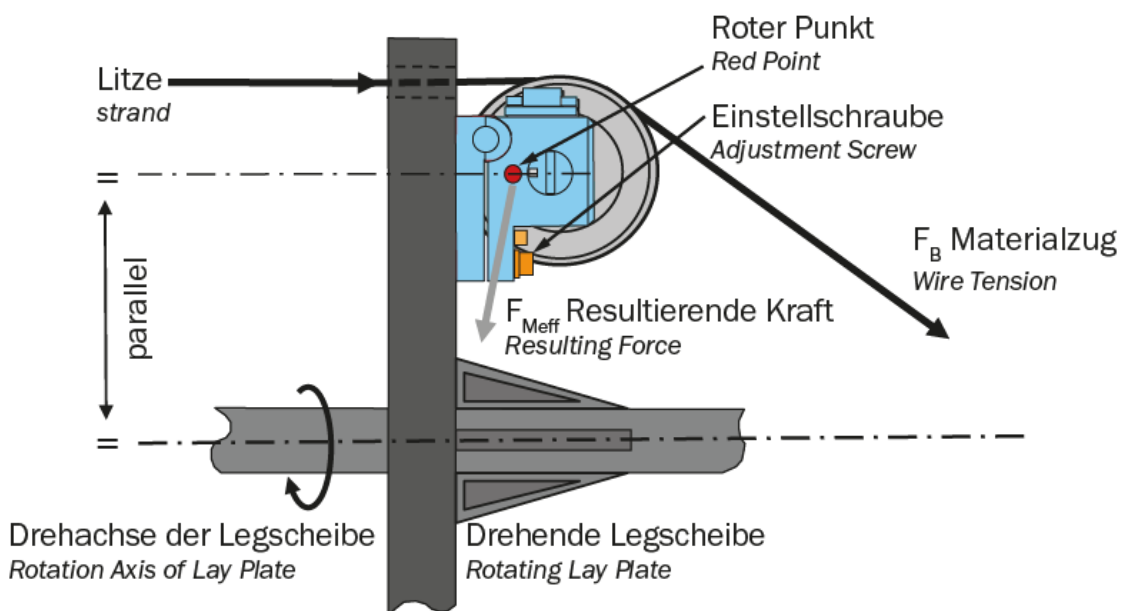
RMGZ200 Red Point alignment on rotating machines
